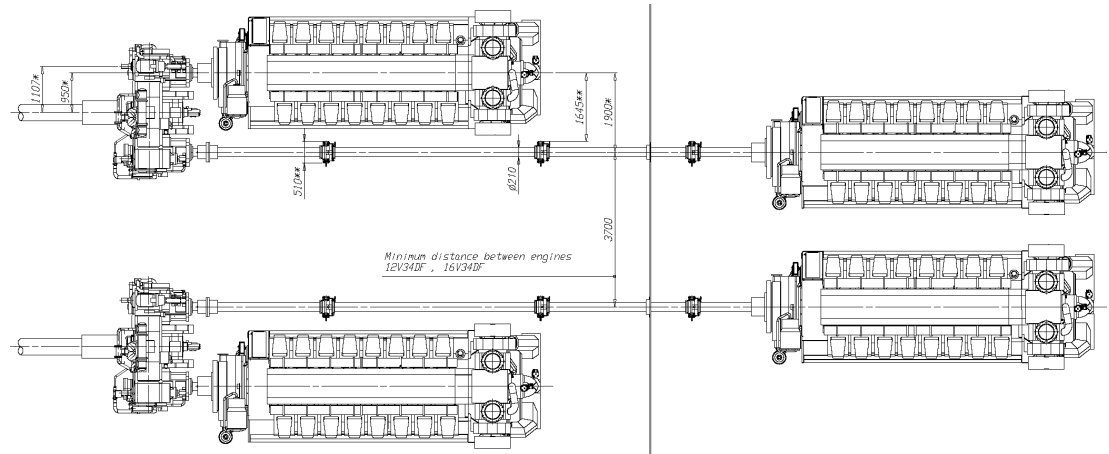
Main engine arrangement, V-engines (DAAE083977, DAAF068349)
